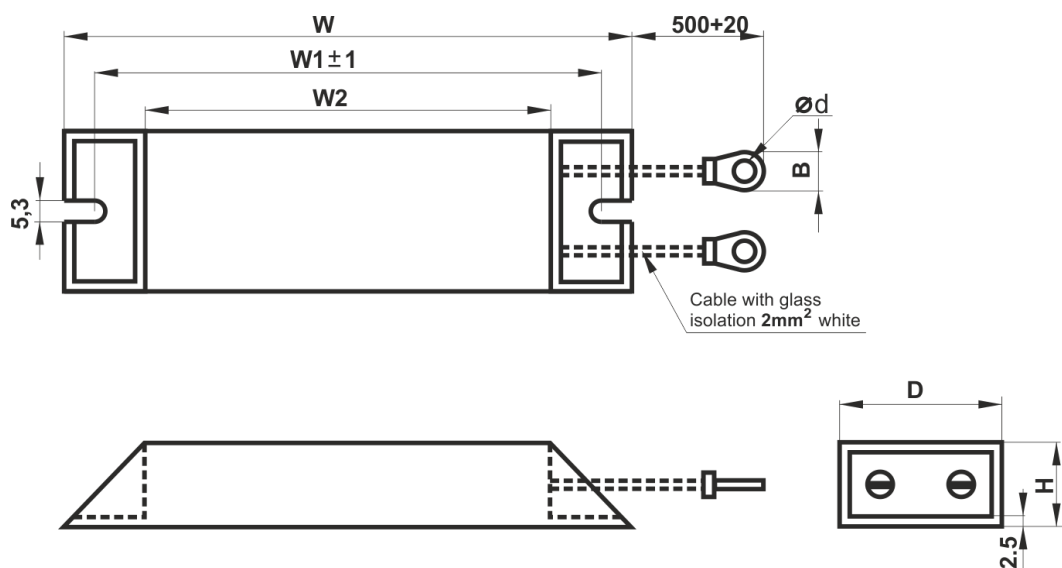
The overall and mounting dimensions of the braking resistors from Table 4.9
